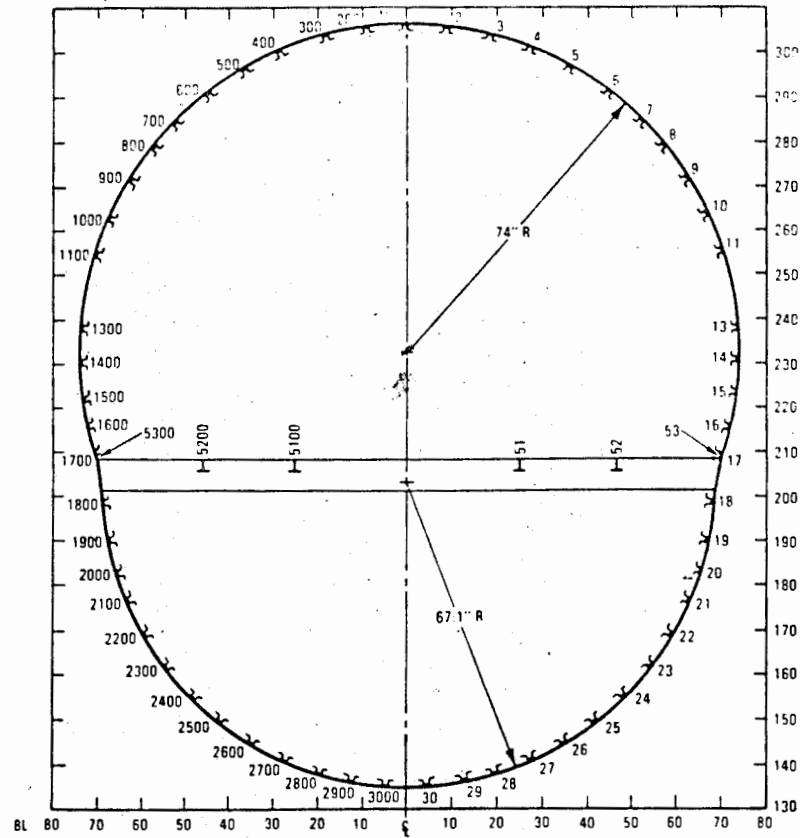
TYPICAL CROSS SECTION WITH STIFFENER LOCATIONS - REAR VIEW
